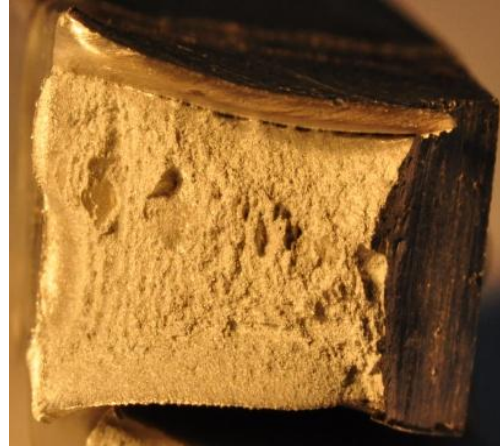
₂. Macrophoto. fracture (700rpm,100mm/min)
